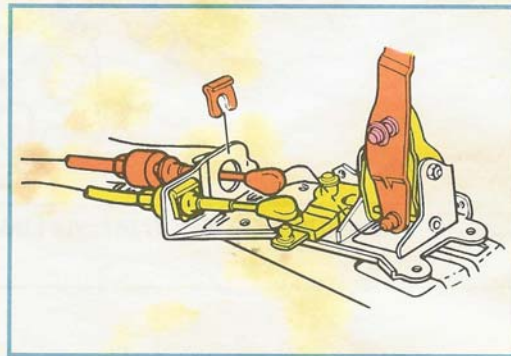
, Front-Wheel-Drive Shift Control Assembly.
